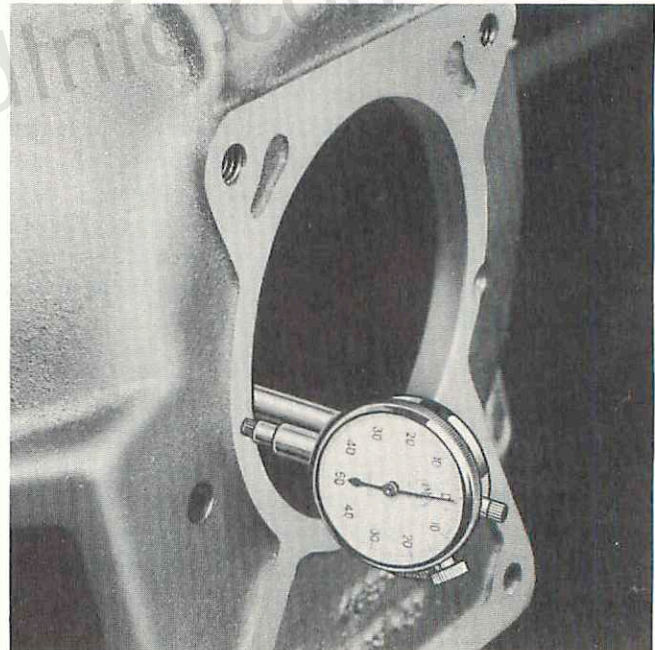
Checking the Bell Housing Alignment with Dial Indicator
